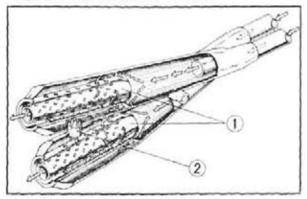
① Exhaust muffler ② Muffler connecting tube
